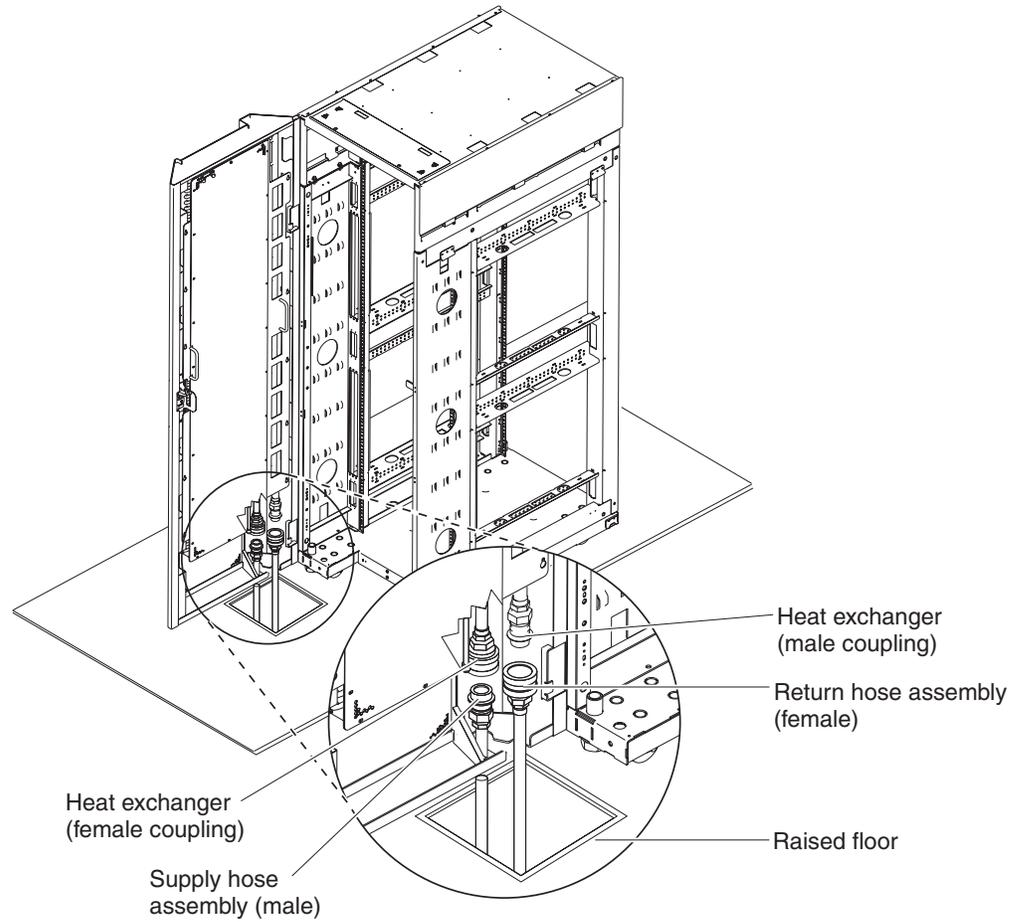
Raised floor hose management example 1; hose exit through floor tile at the door hinge
